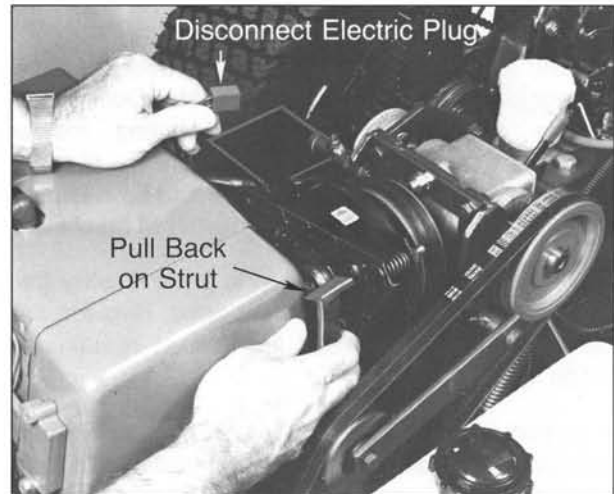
Disconnect Electric Clutch for PTO Belt Removal
